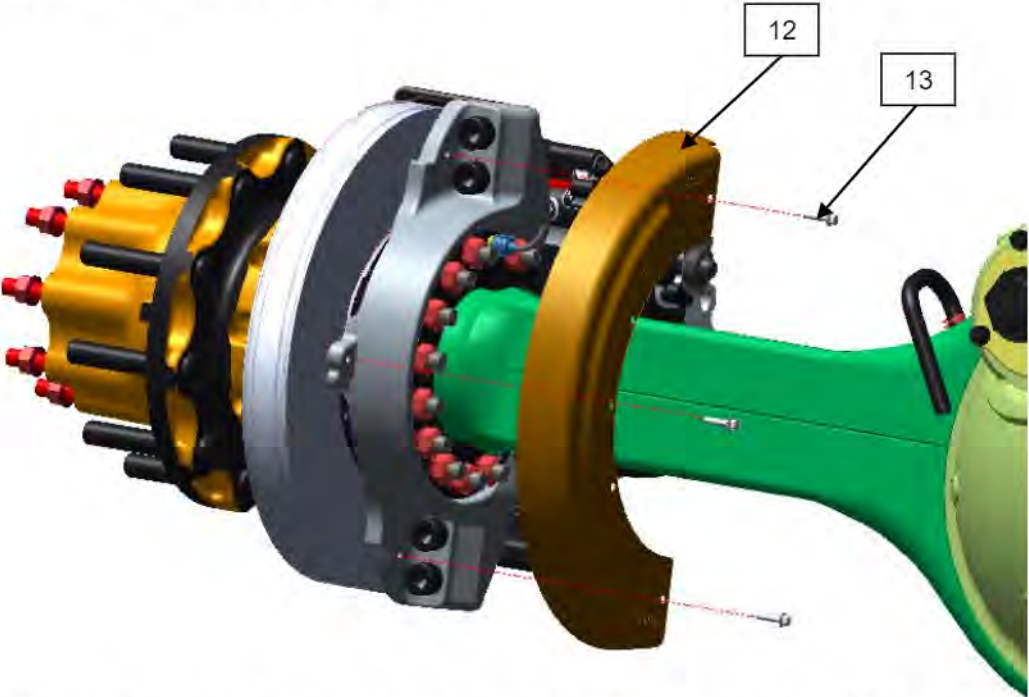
Drive Axle Showing the Hardware Needed to Attach the ADB Rotor Shield
